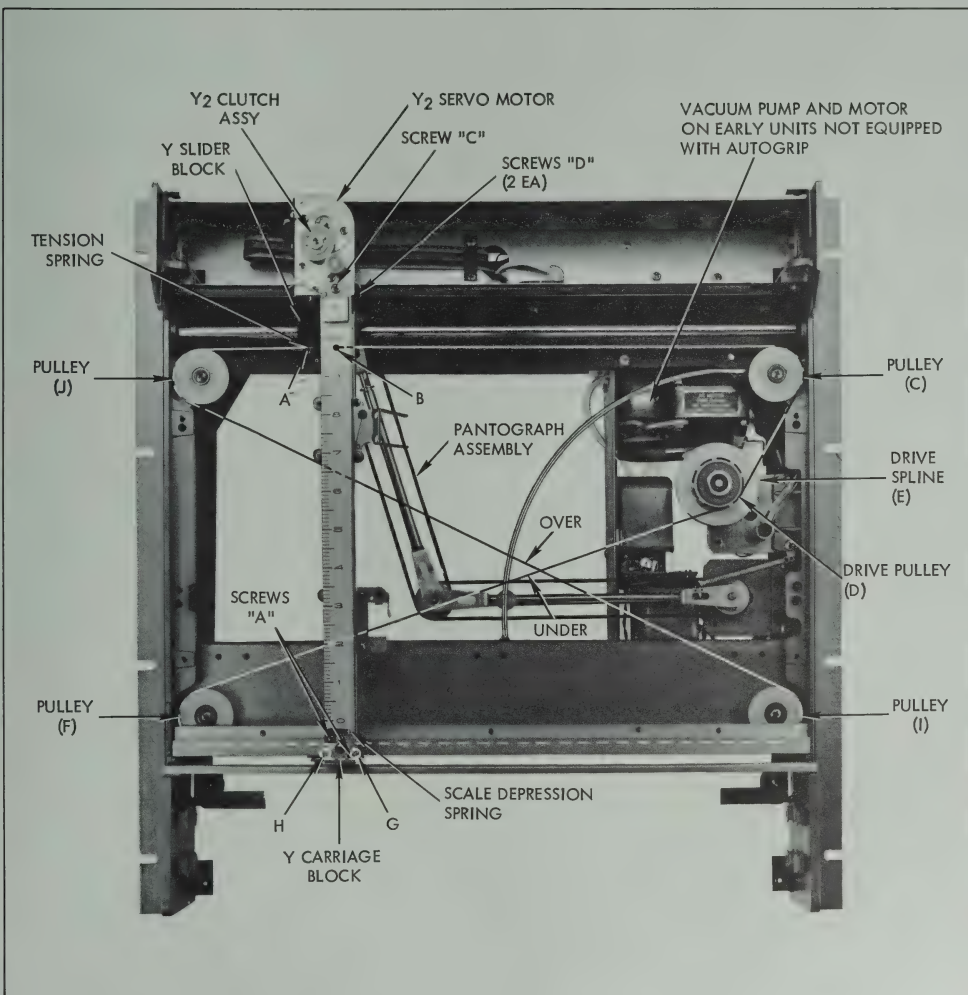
2FRA WITHOUT PLATEN (FRONT VIEW)
